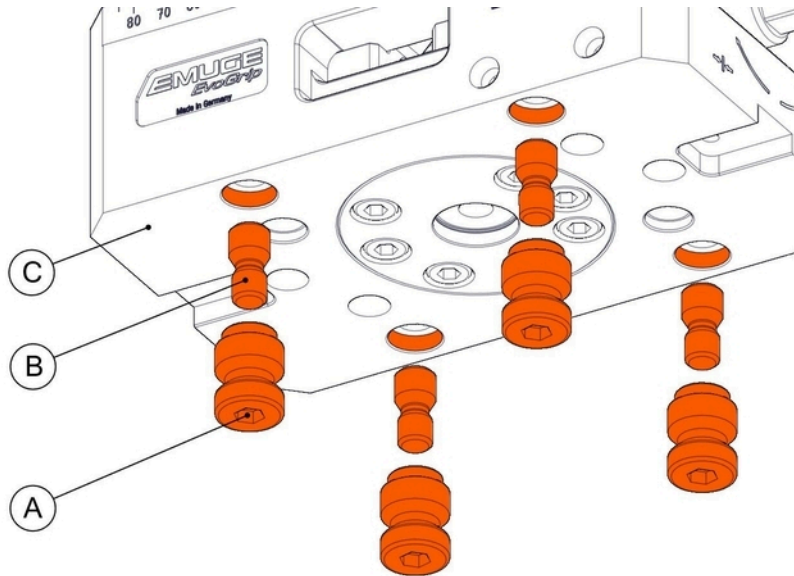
Schematic illustration: Assembly / disassembly of the locating bolts for compatible zero-point systems
